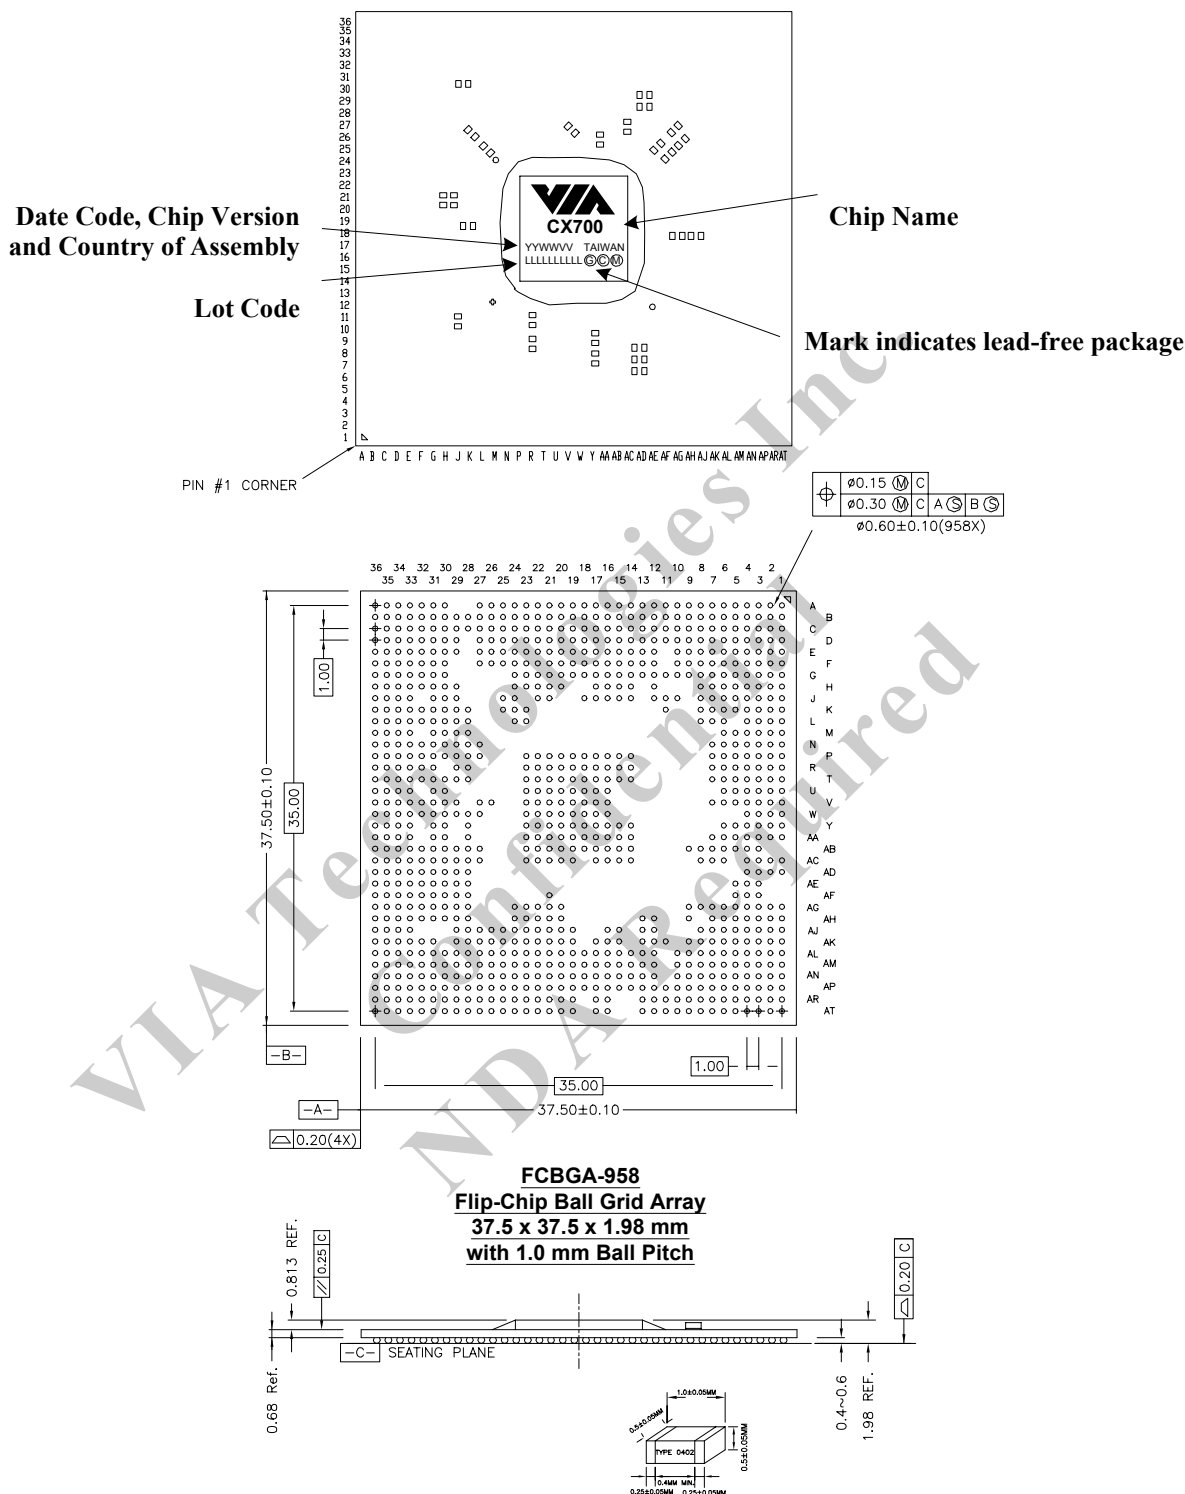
Lead-Free Mechanical Specifications – FCBGA-958 Ball Grid Array Package
